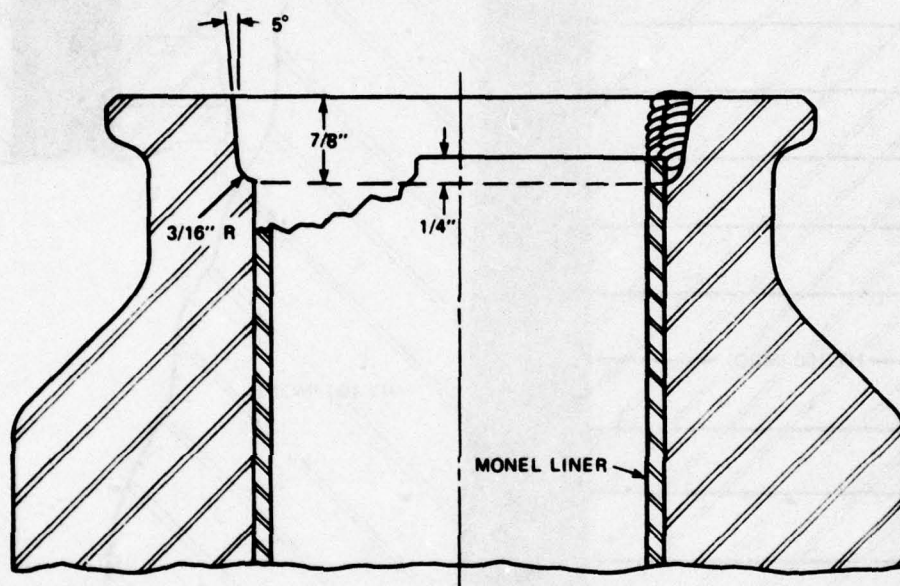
Welding Details for Lining Large Nozzle
